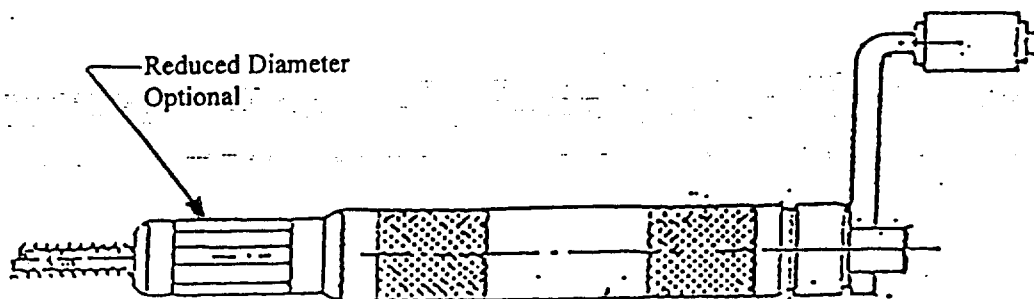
Type III, Class 1, Style A, prewinder inserting tool with threaded mandrel for 1/2 (.500) inch and smaller unified coarse, unified fine and spark plug threads
